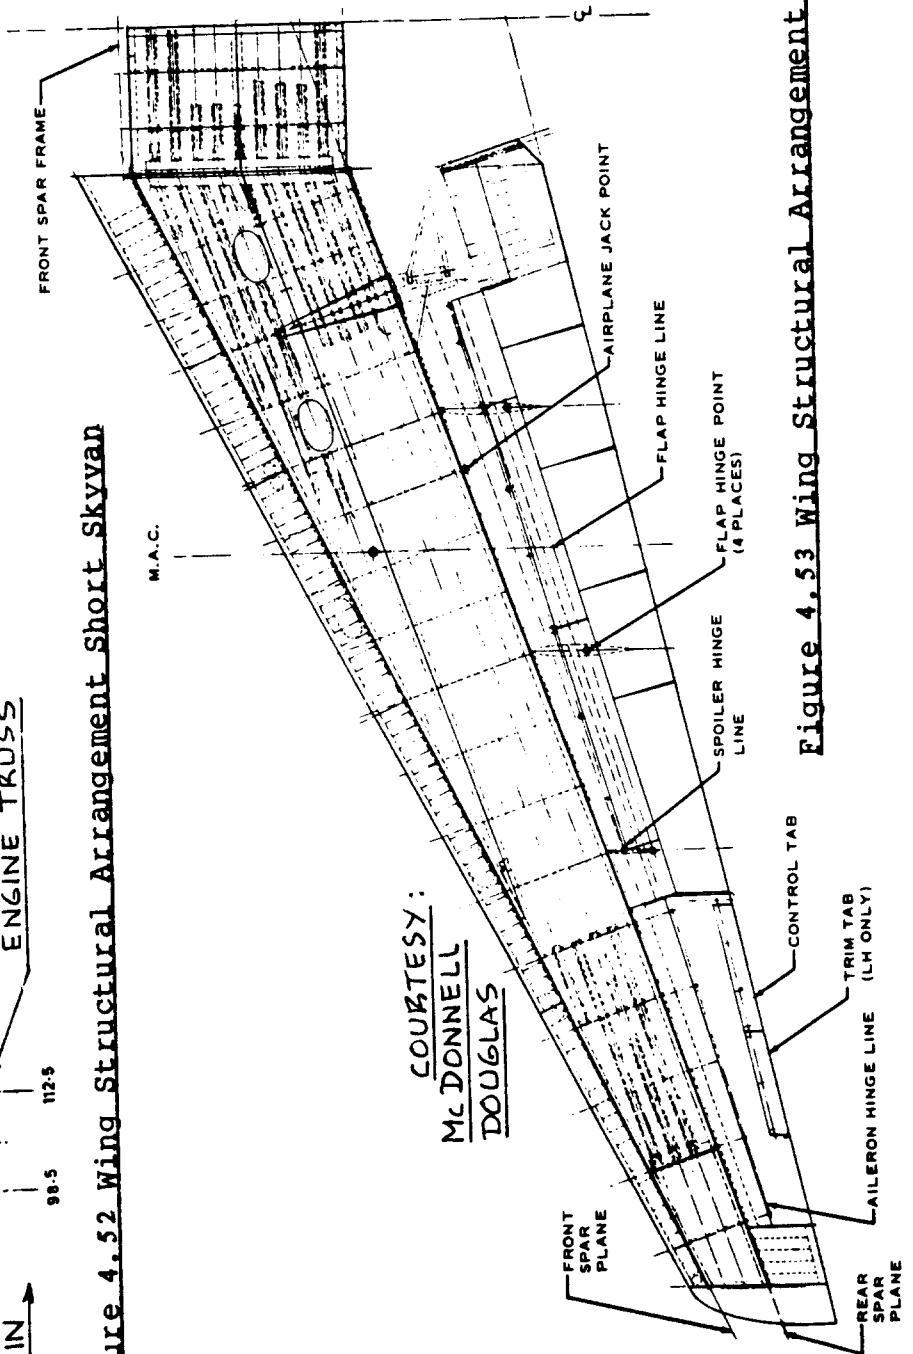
Wing Structural Arrangement McDD DC-9-30
